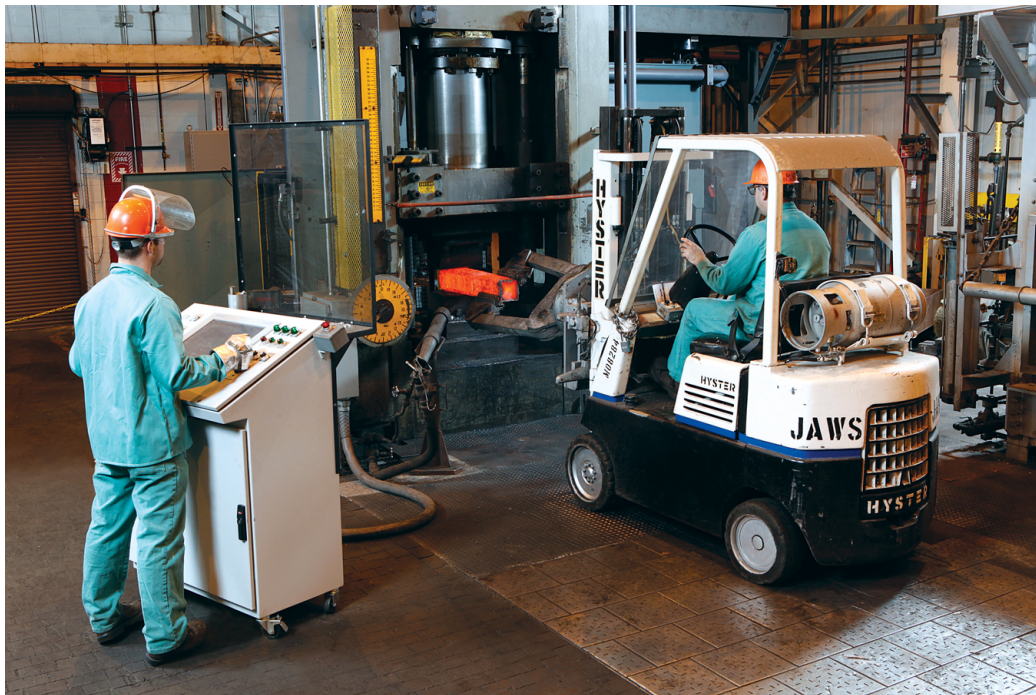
Large scale industrial forging press located at Carpenter Technology Corporation Reading PA. Used for forging the large scale billets of the alloy 131072. Image Courtesy of Carpenter technology.
